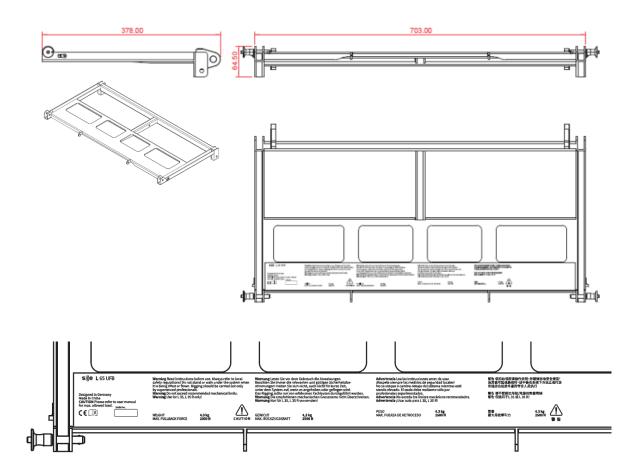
L 65 UFB views and dimensions. Annotations given in millimeters.
